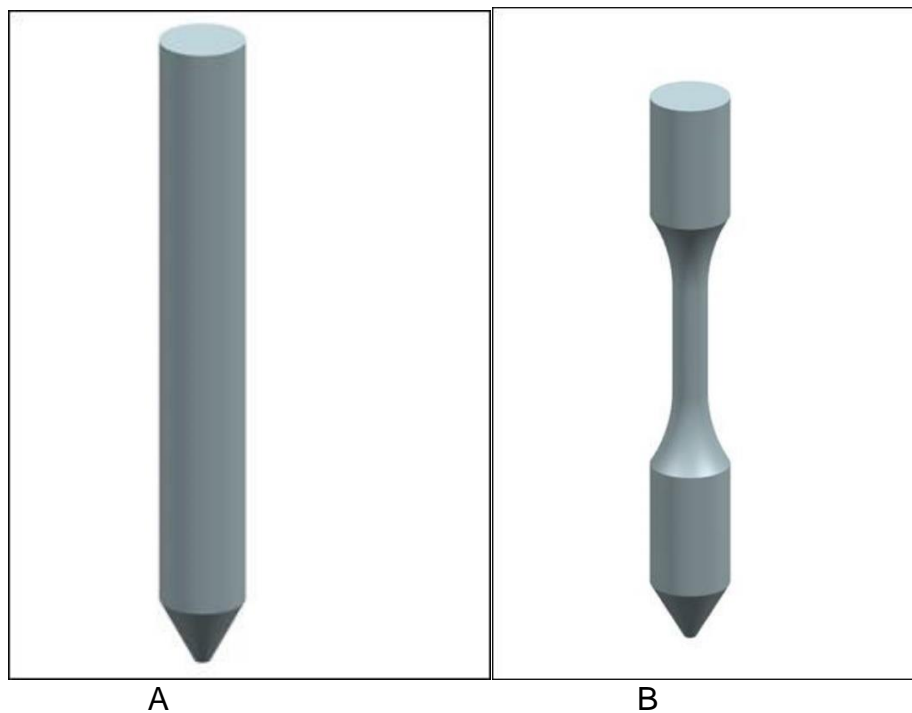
Models of Tensile Coupons Used for Testing: A) to be machined and then tested, and B) to be tested as built.
